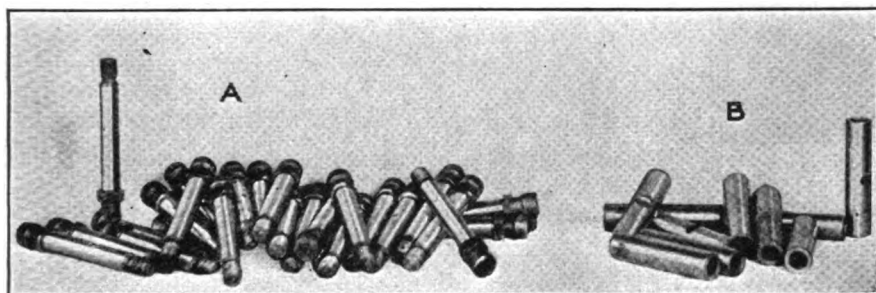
SPRING BOLTS AND PISTON PINS GROUND IN THE CENTERLESS GRINDING MACHINE
